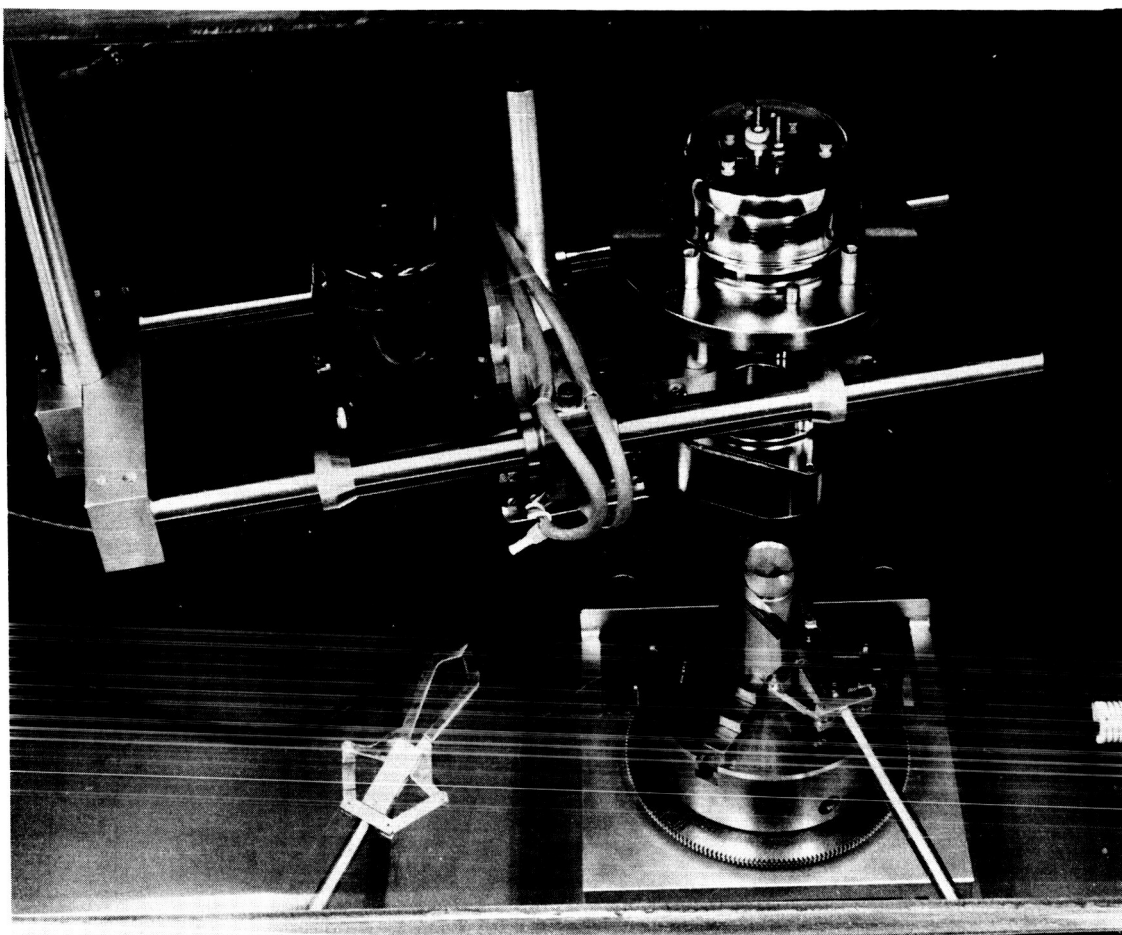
View Through Vacuum Chamber Window Showing Electron Gun and Positioning Boom, Turntable, and Manipulator With Capsule
